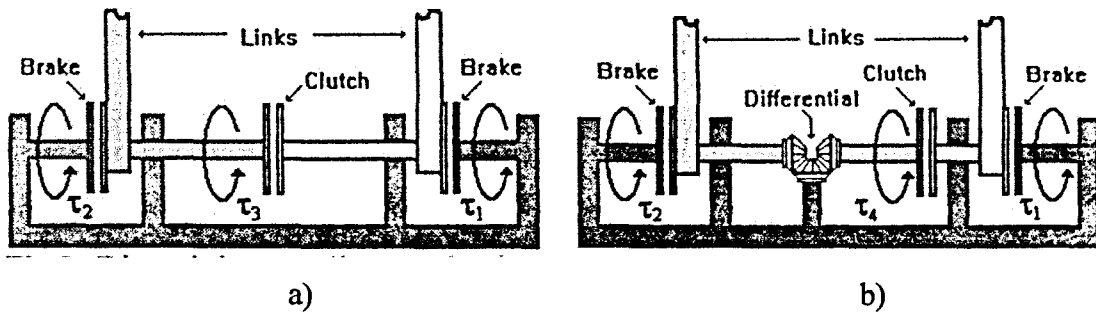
Joint coupling mechanism, a) Direct, b) Inverting [69]
